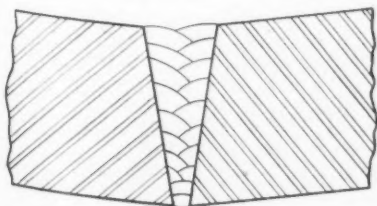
Exaggerated example of warpage resulting from shrinkage in a single V type weld.
